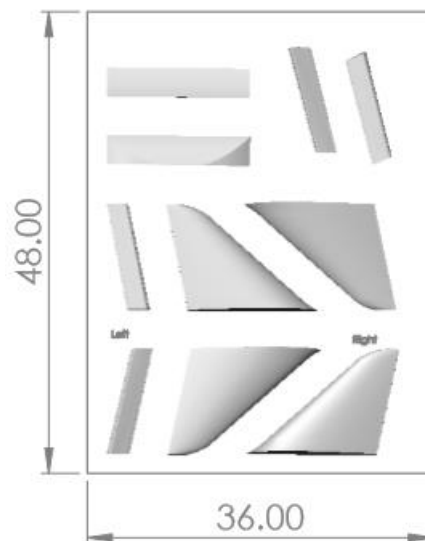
Solidworks drawing of foam mold wing and control surface sections (inches)
